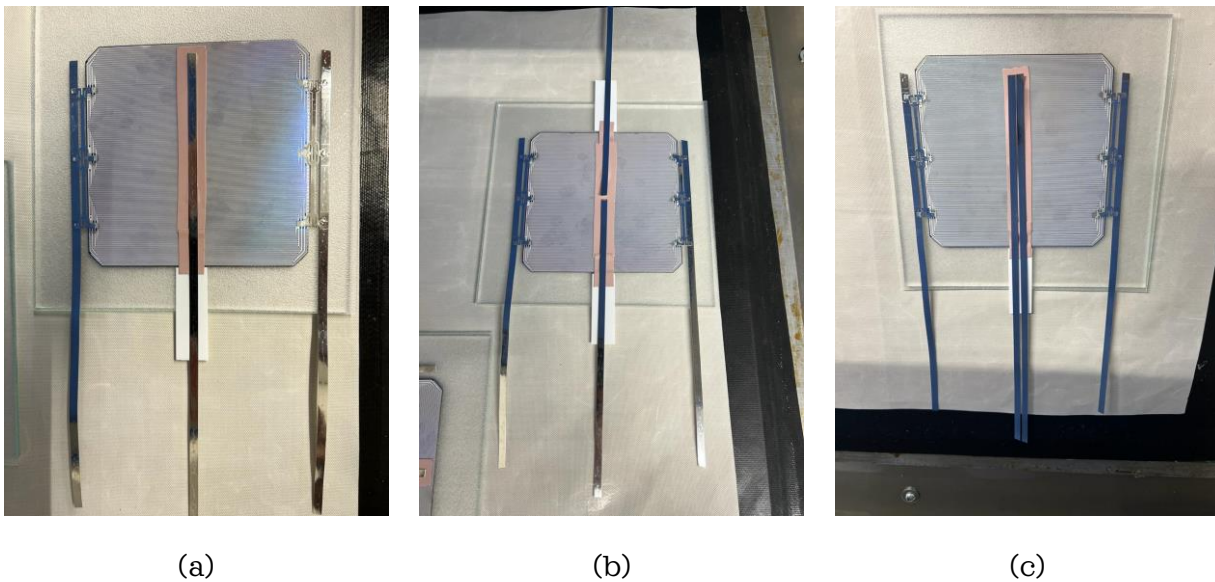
a) Backside view of Prototype 1A b) Backside view of Prototype 2A c) Backside view of Prototype 3A
